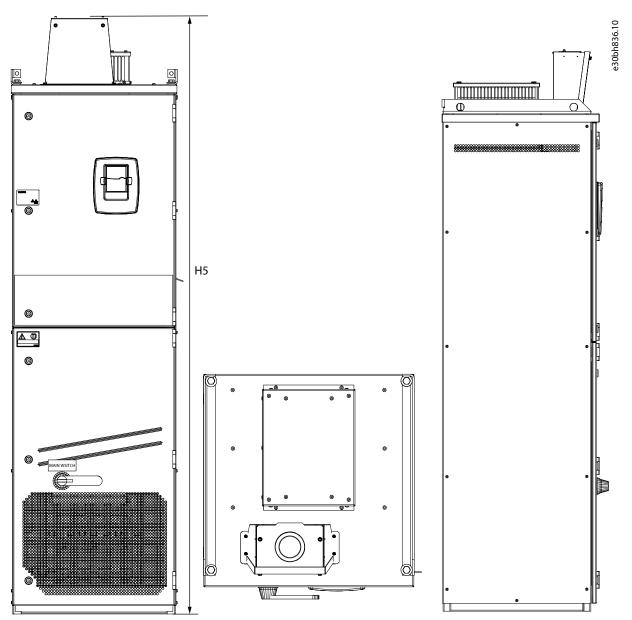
Dimensions of the VACON® NXS/NXP AC Drive, FR10 and FR11 Standalone with DC Connection Extension Box
